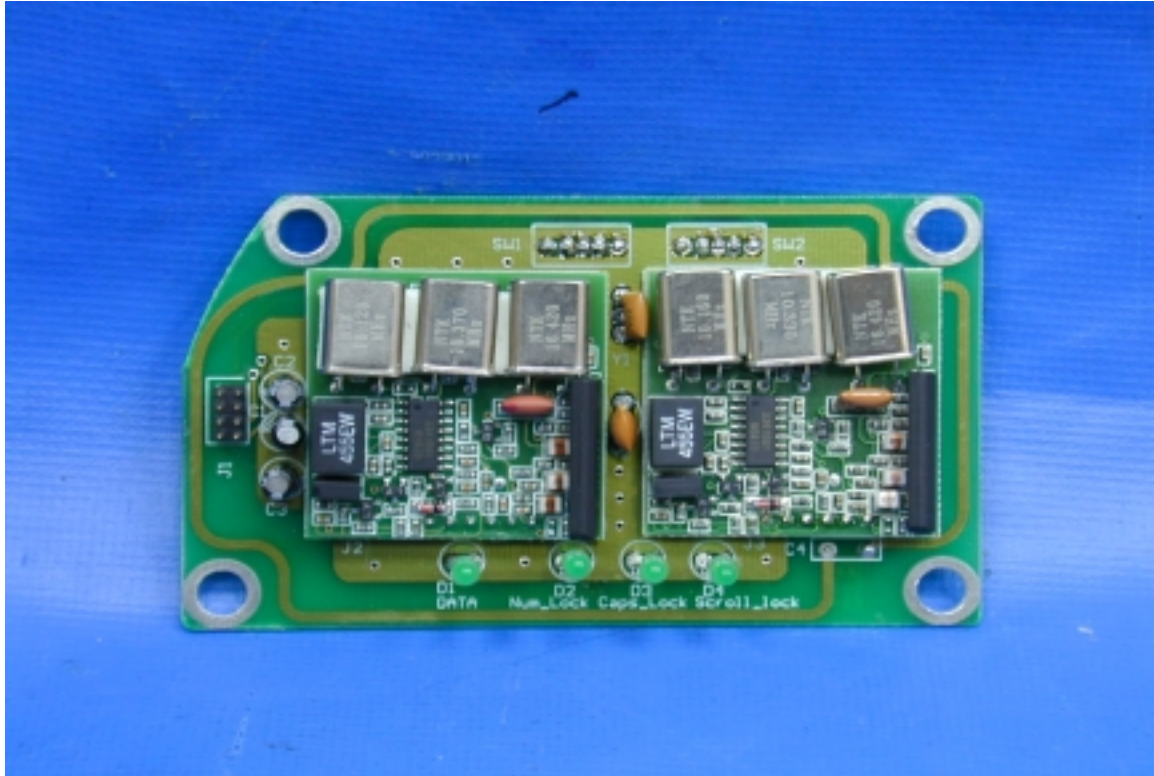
EUT (RX Model CKM001) SOLDERING SIDE VIEW
